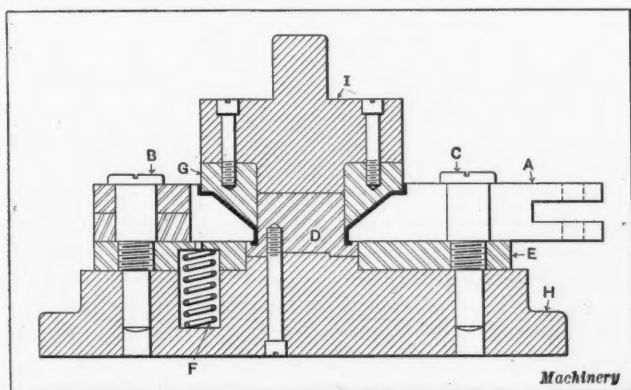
Die provided with Two Members that can be swung aside to permit the Removal of the Shell
